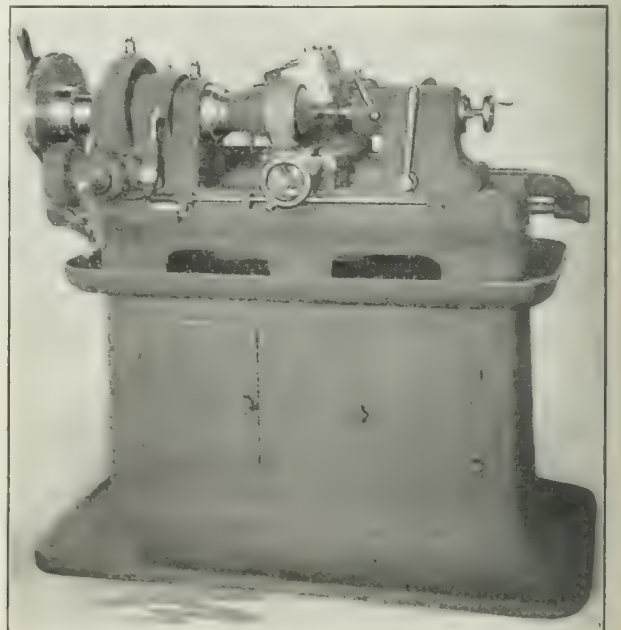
The 6 x 14 In. Pratt & Whitney Thread Miller Arranged to Cut Spiral Gears.
